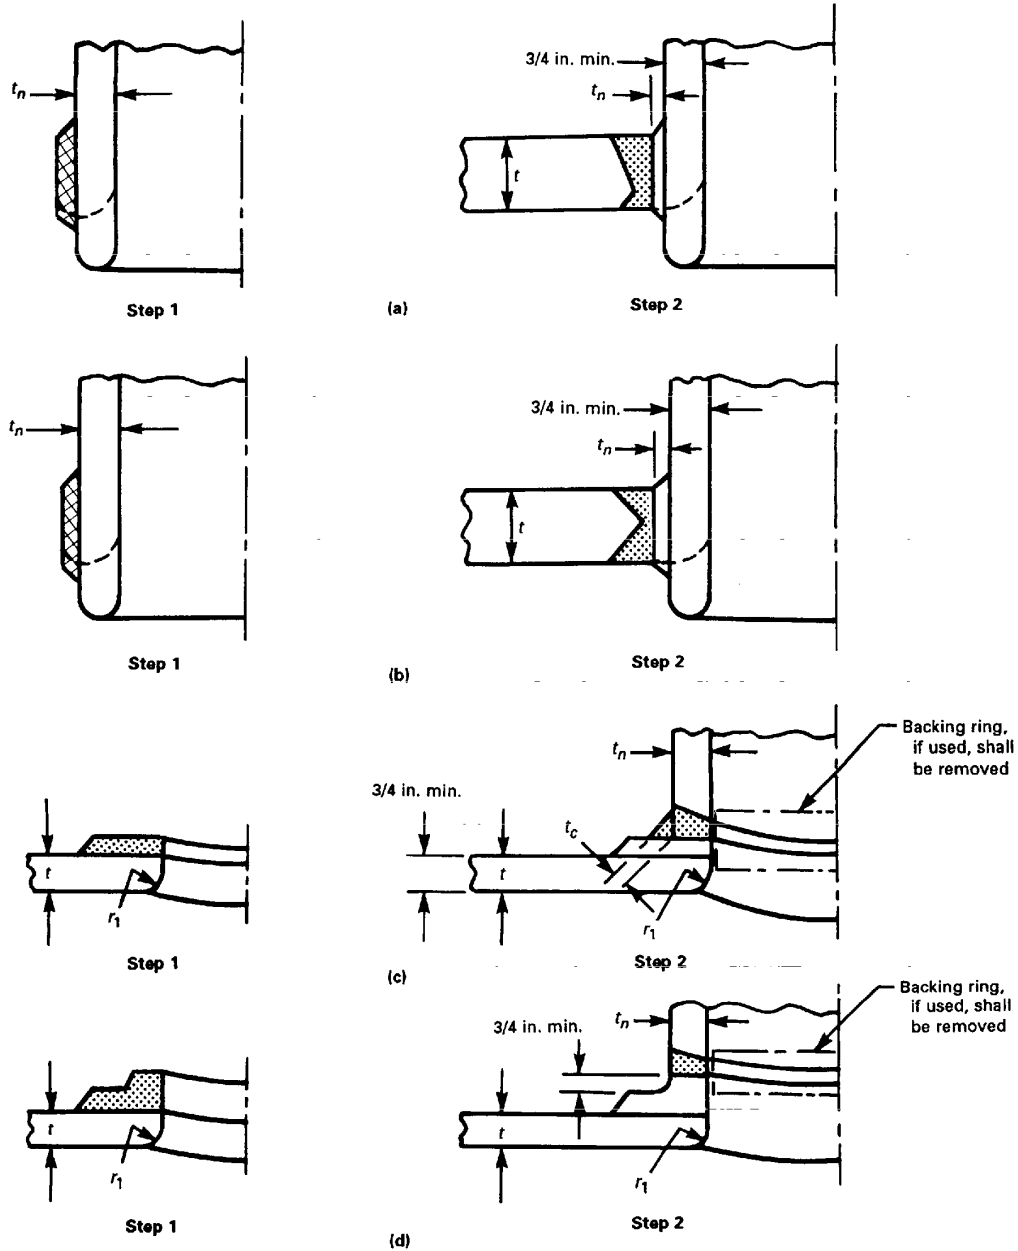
(a)-1 NOZZLE, BRANCH, AND PIPING CONNECTIONS JOINED BY FULL PENETRATION BUTT WELDS
